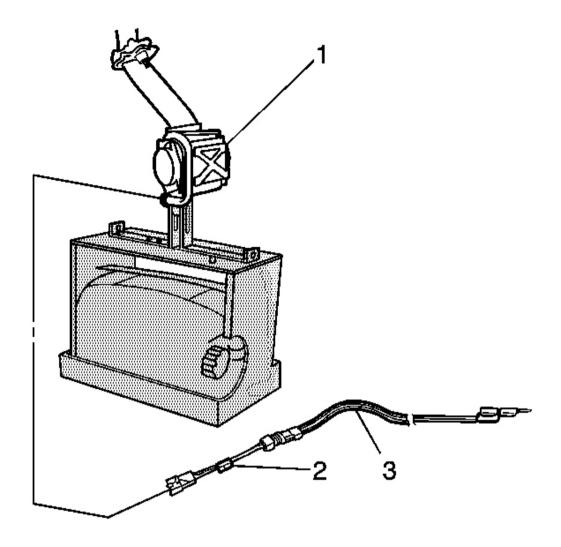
SIR Deployment Harness & Pigtail Adapter Courtesy of GENERAL MOTORS CORP.
